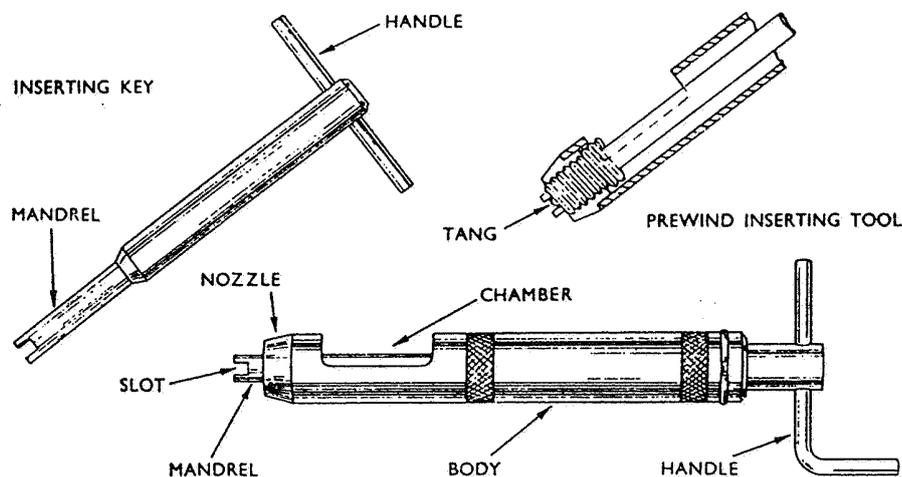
INSERTING KEY AND PREWIND INSERTING TOOL
